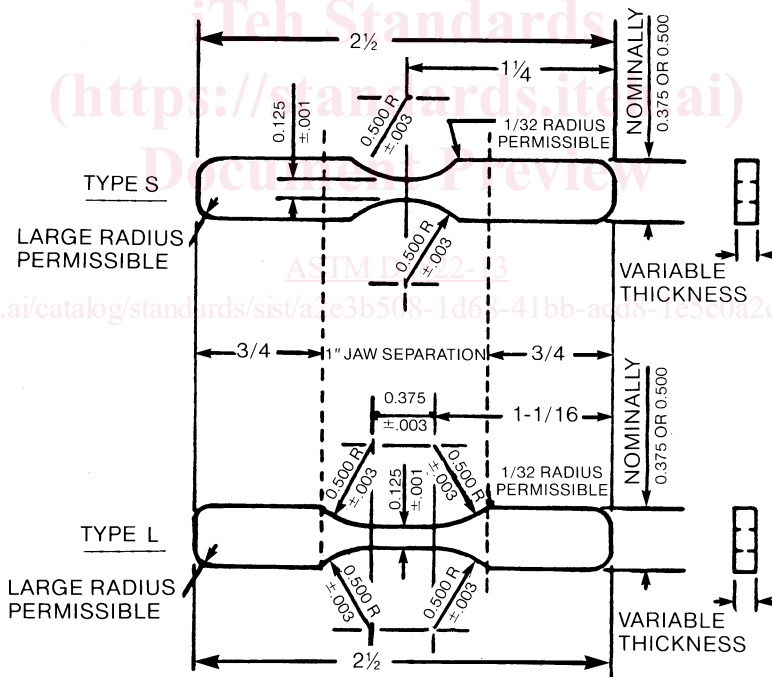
B Mold Dimensions of Types S and L Tension-Impact Specimens (Dimensioned in Inches)
